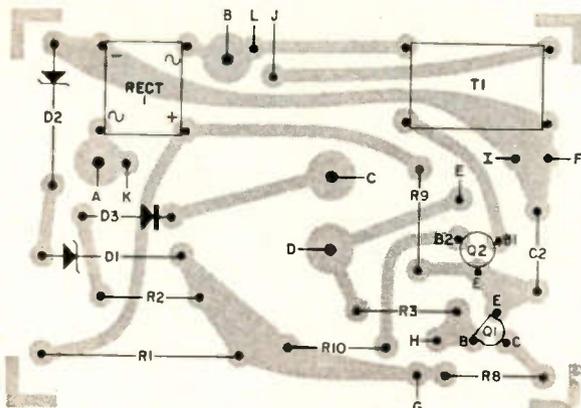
Observe proper polarities when mounting diodes, transistors, triac, and rectifier assembly.
